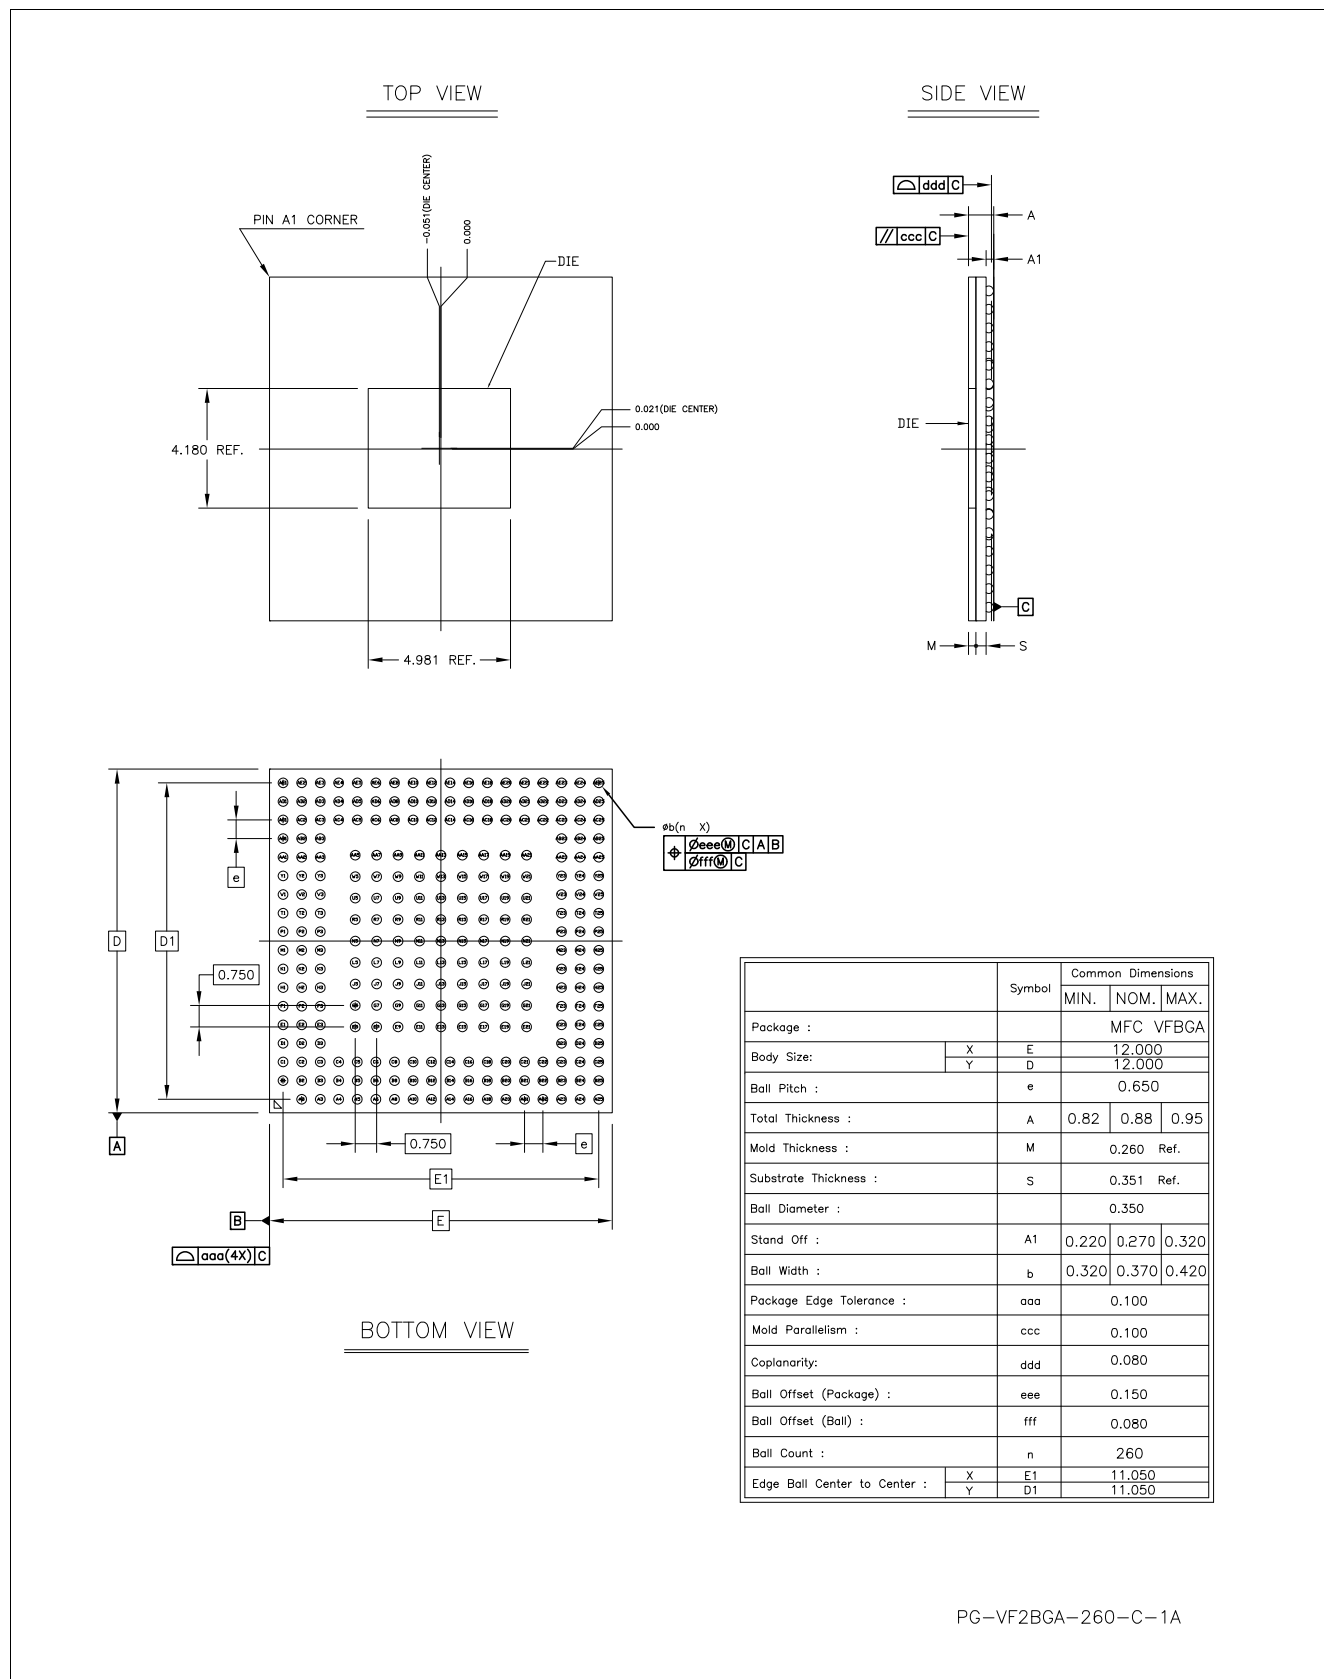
PG-VF2BGA-260 12 mm x 12 mm Package Outline
